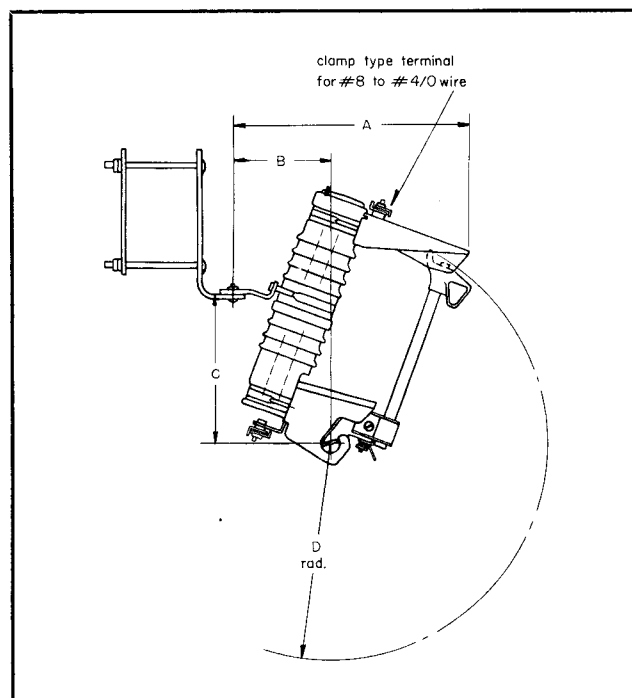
Cutout Properly Bolted to Mounting Bracket
